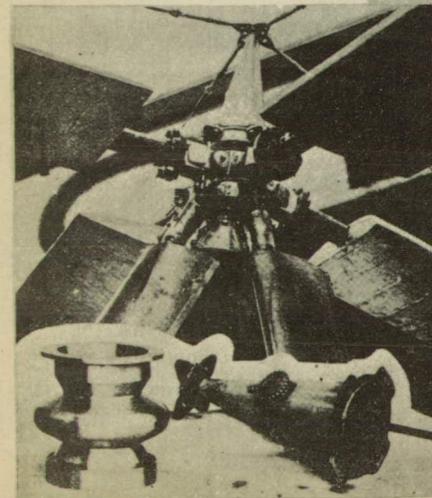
The rotor head. The flange couplings of the spars will not be incorporated in the production type. Below is the conical top of the head. This serves as an oil tank. Note the filler cap on the side. On the left, the blank for the rotor head.
